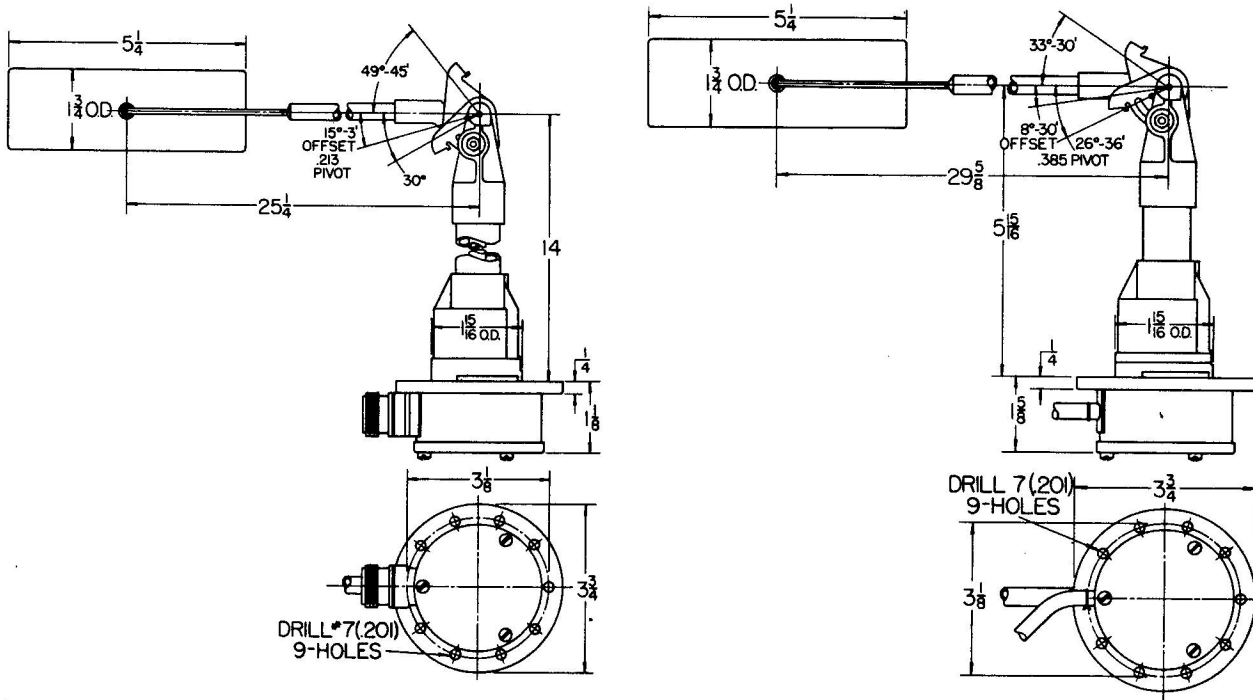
(Sheet 5 of 9 Sheets). General Dimensions
